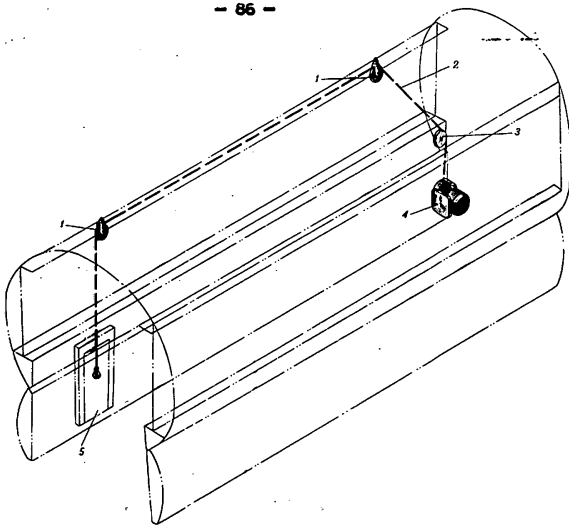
ARRANGEMENT OF CABLES FOR HOISTING AND LOWERING BOMB RACKS
